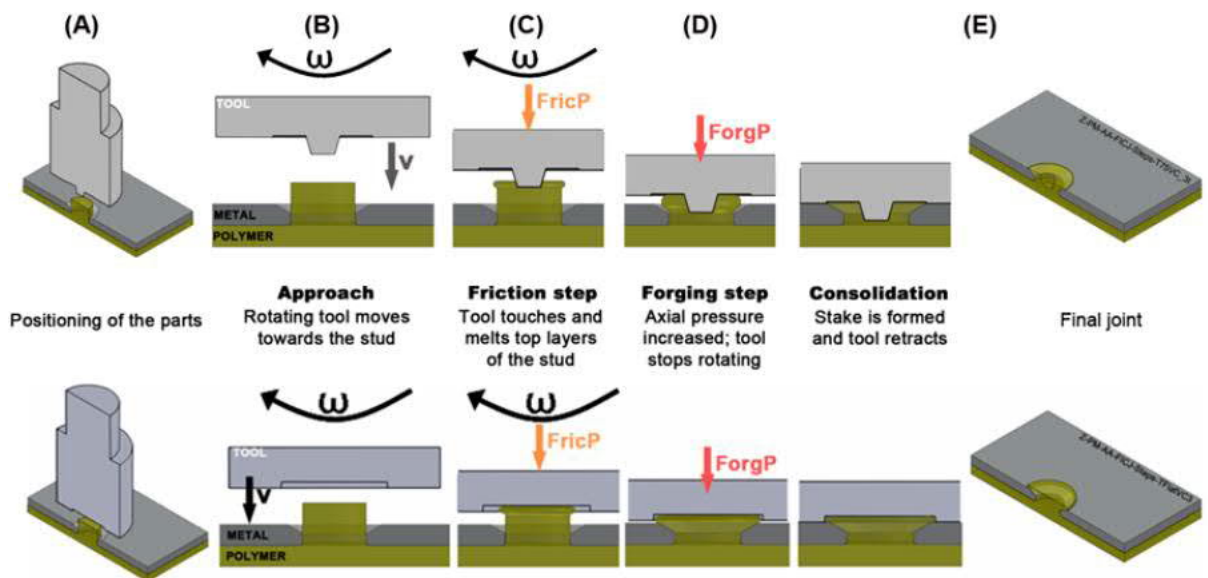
F-ICJ steps using flat tool and conical-pin tool [17]
